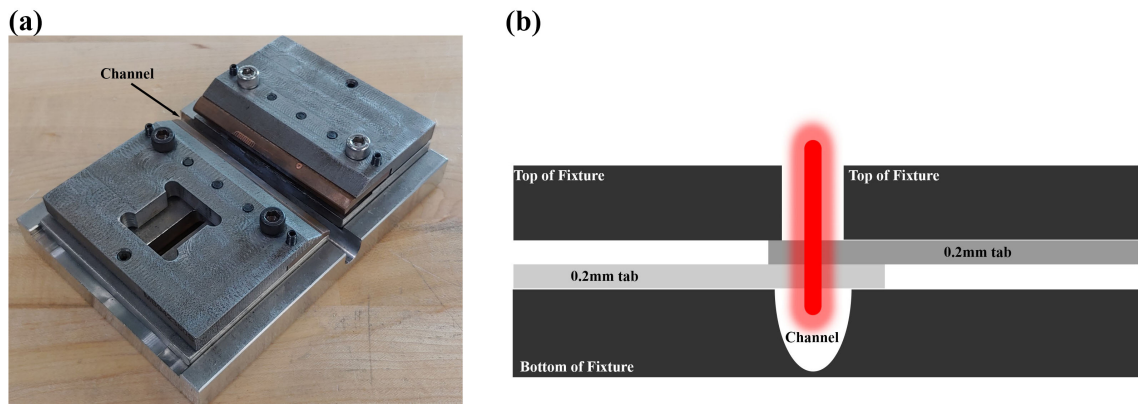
(a) The channel flat fixture utilized for welding, and (b) a cross-sectional view of the two tabs within the fixture during welding.
